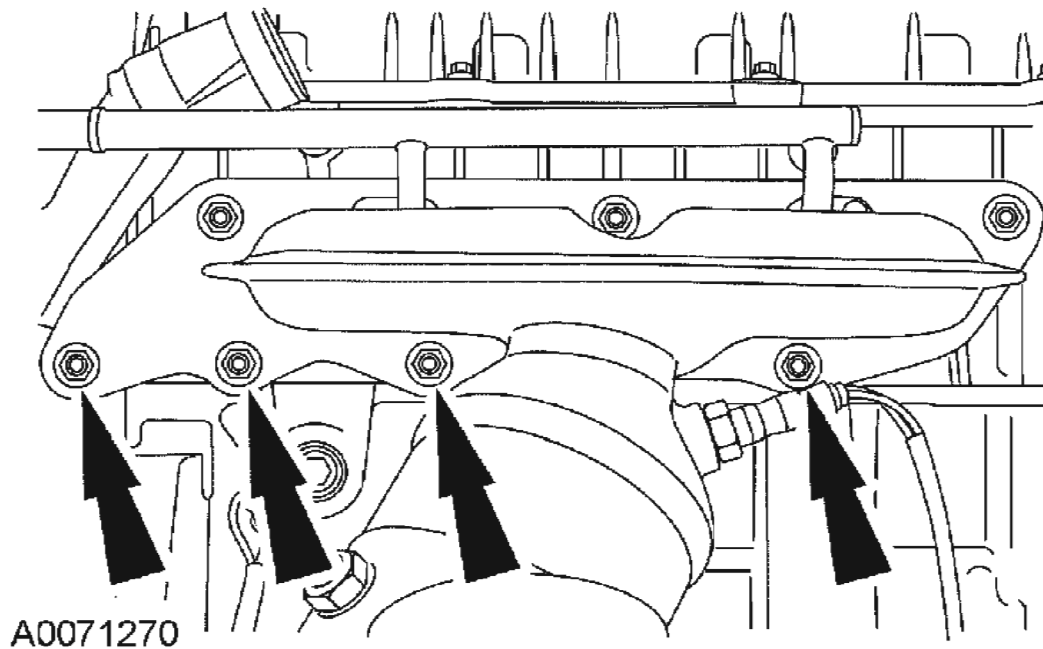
Removing Lower 4 Catalytic Converter Nuts
